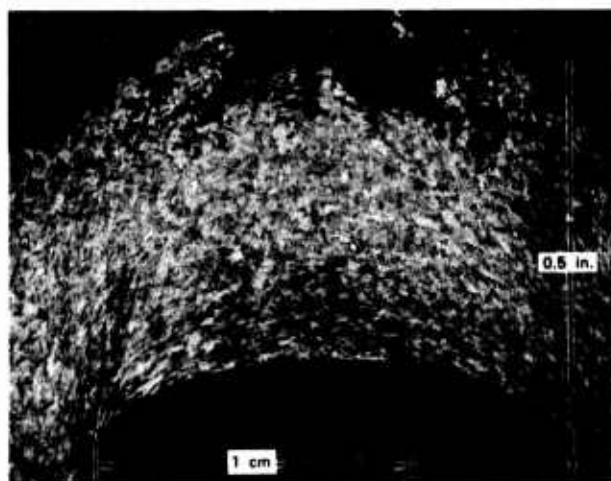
BACK SURFACE FRACTURE IN ARMCO IRON SPECIMENS
